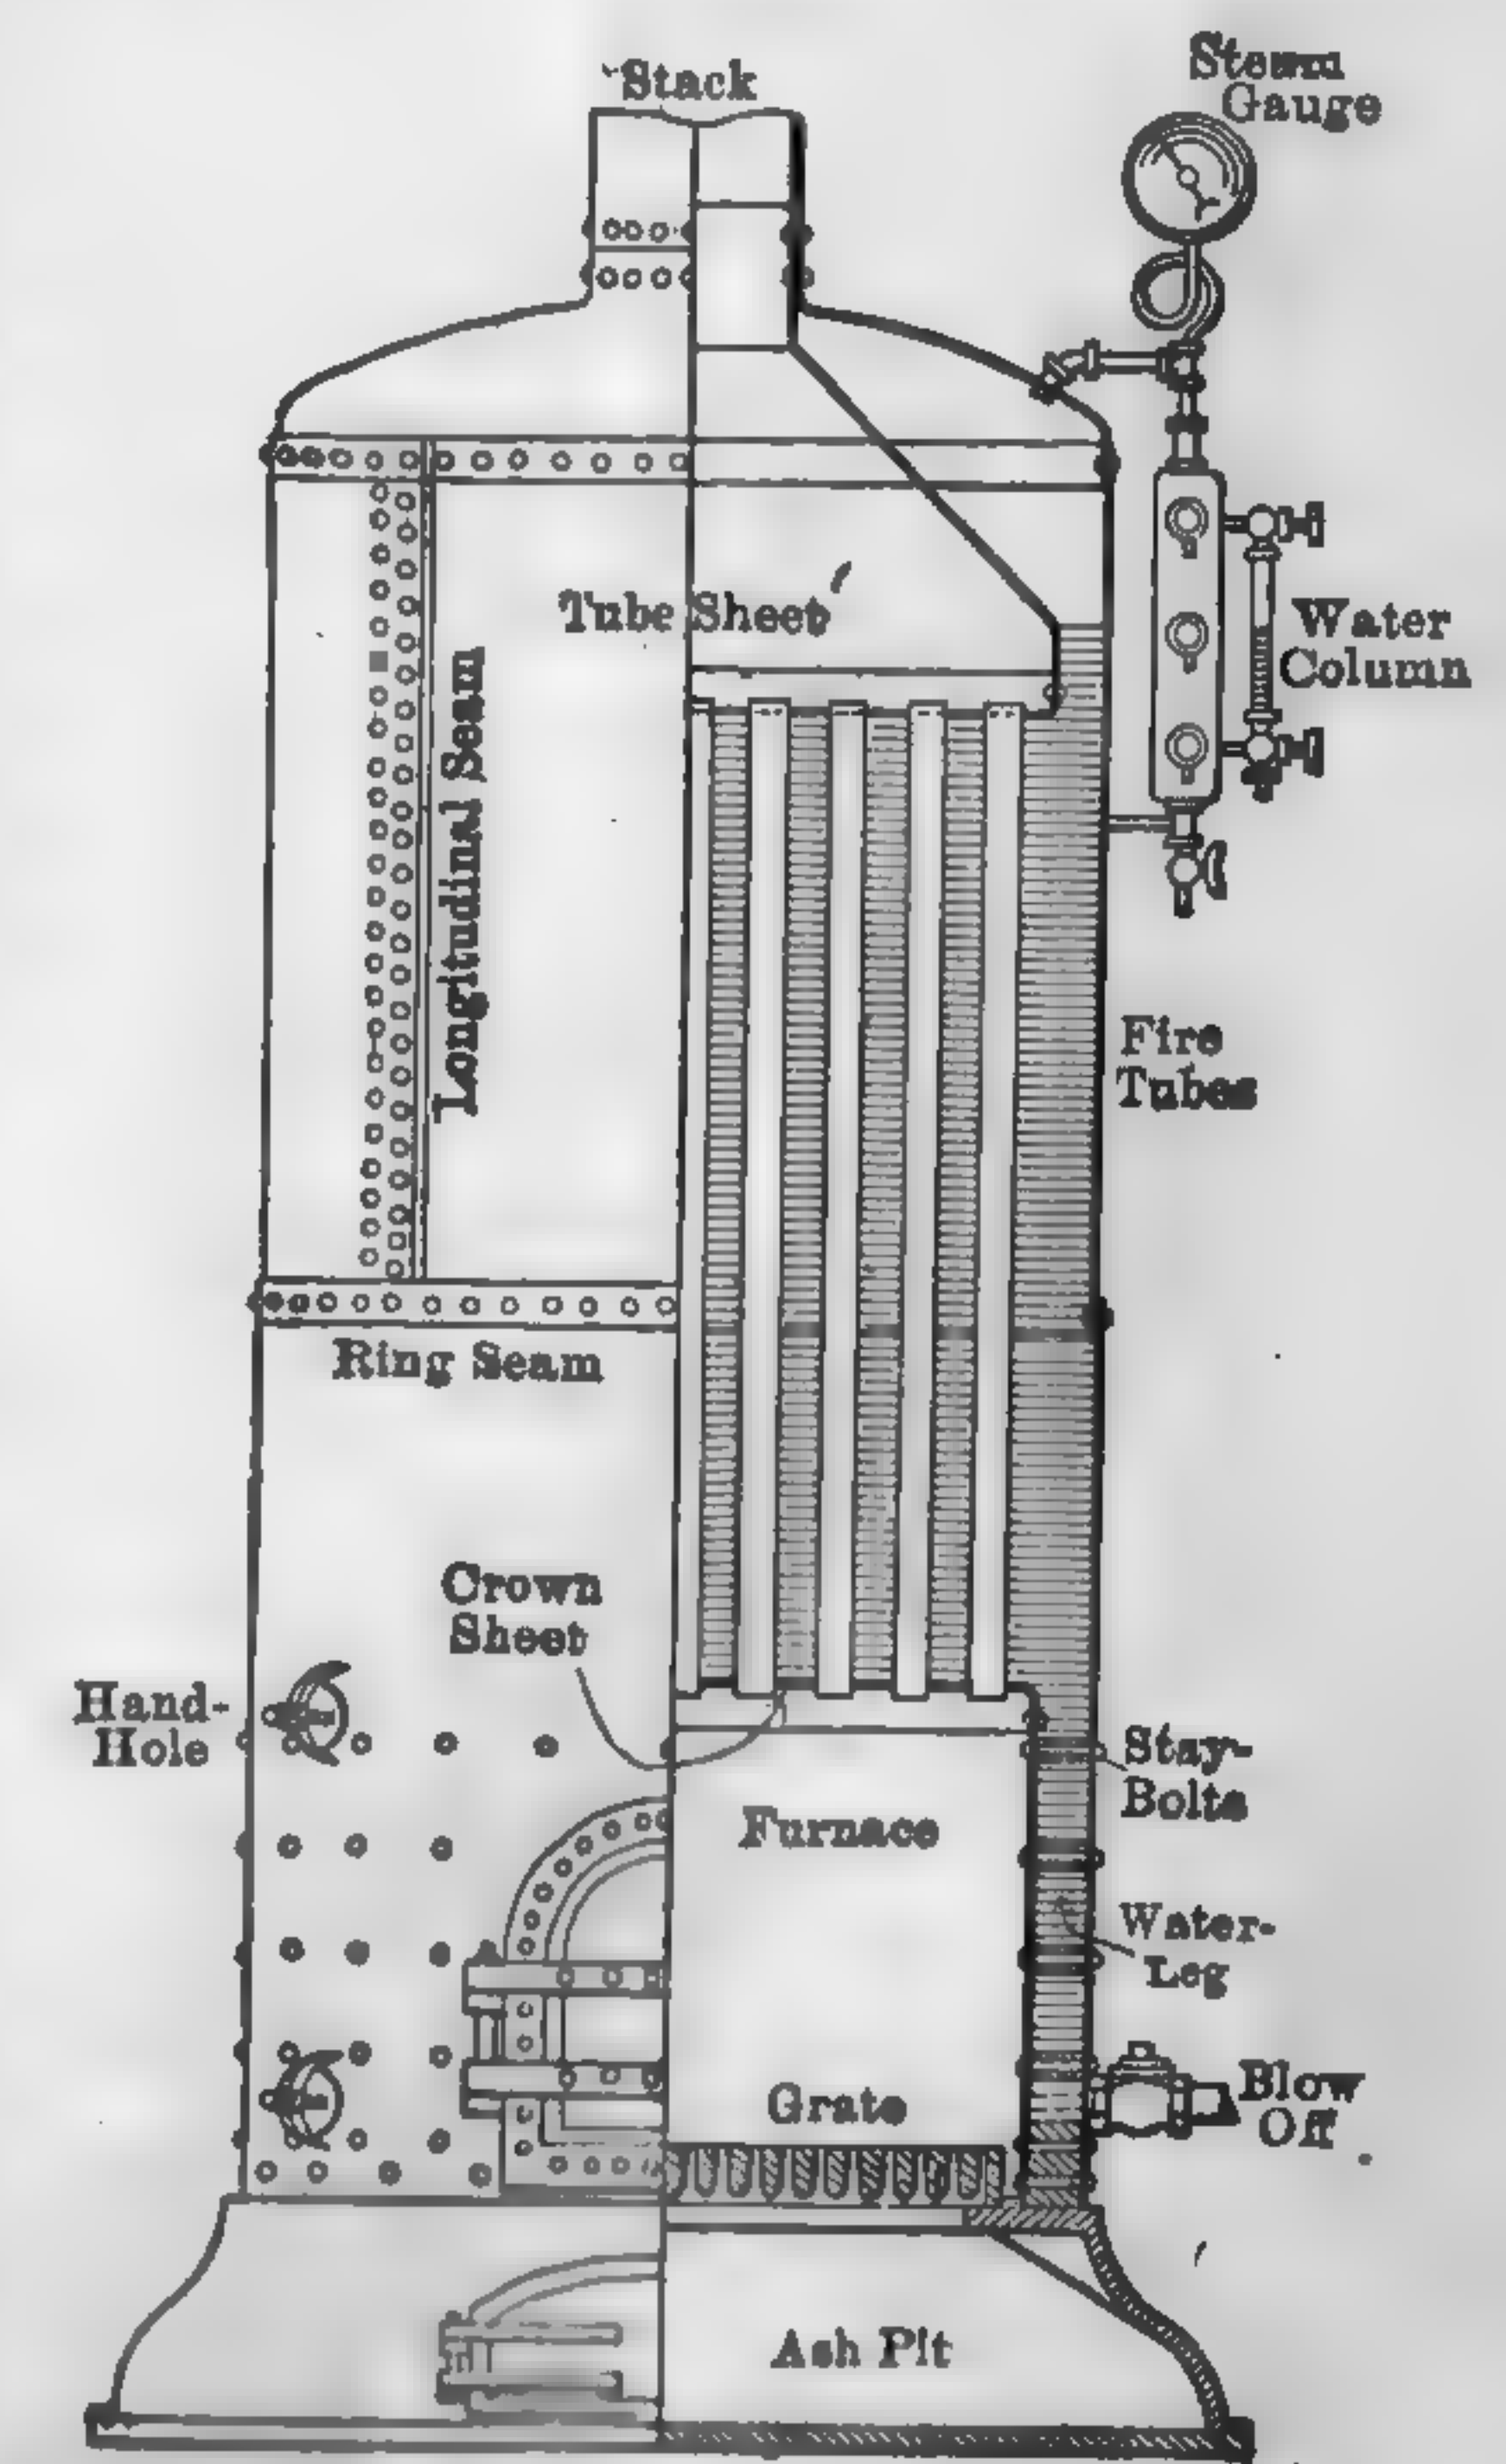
Vertical Tubular Boiler with Submerged Tube Sheet.
